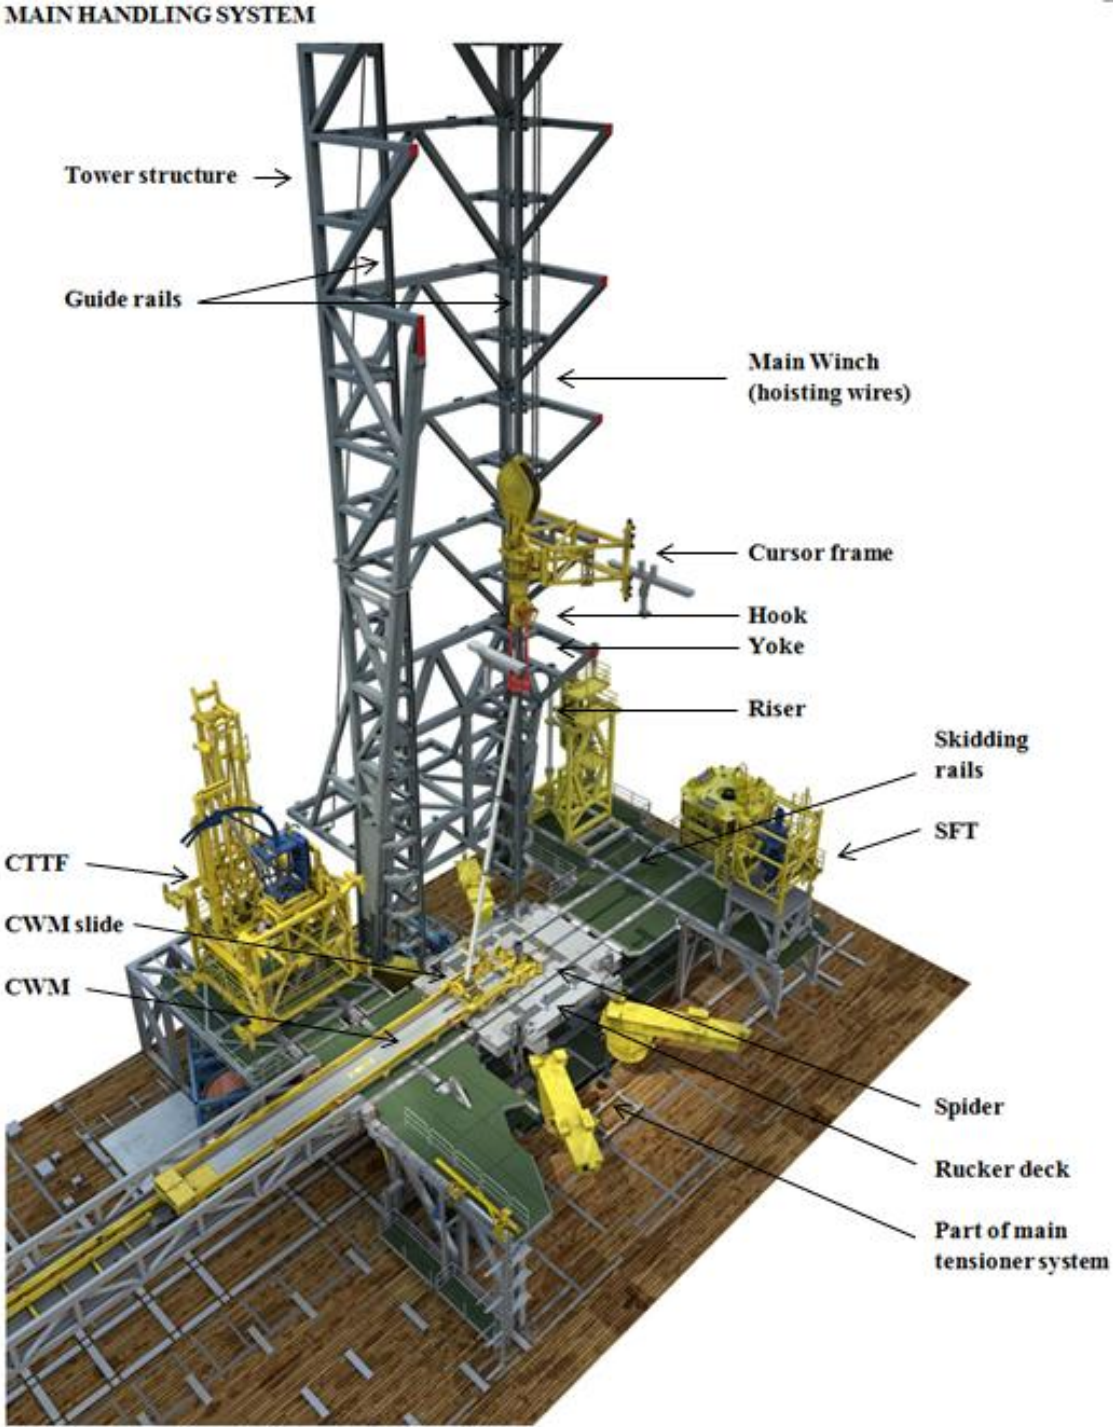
Tower assembly on Skandi Aker; Aker Oilfield Services
